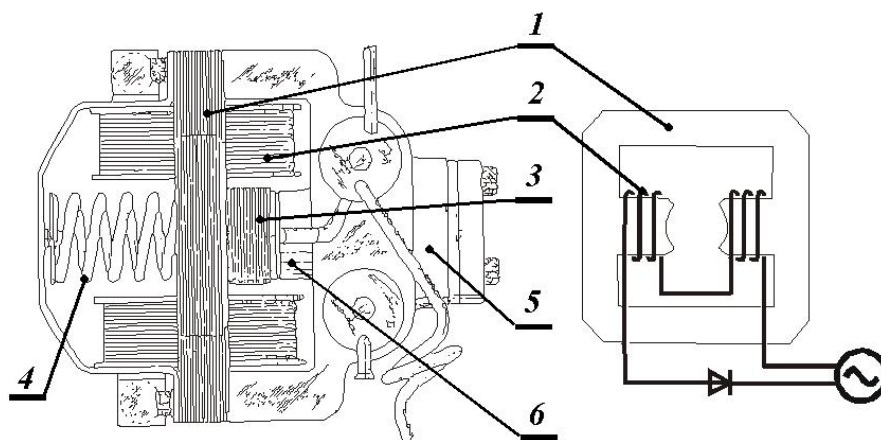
Compressor driven by oscillating linear electrical motor and electrical circuit;
